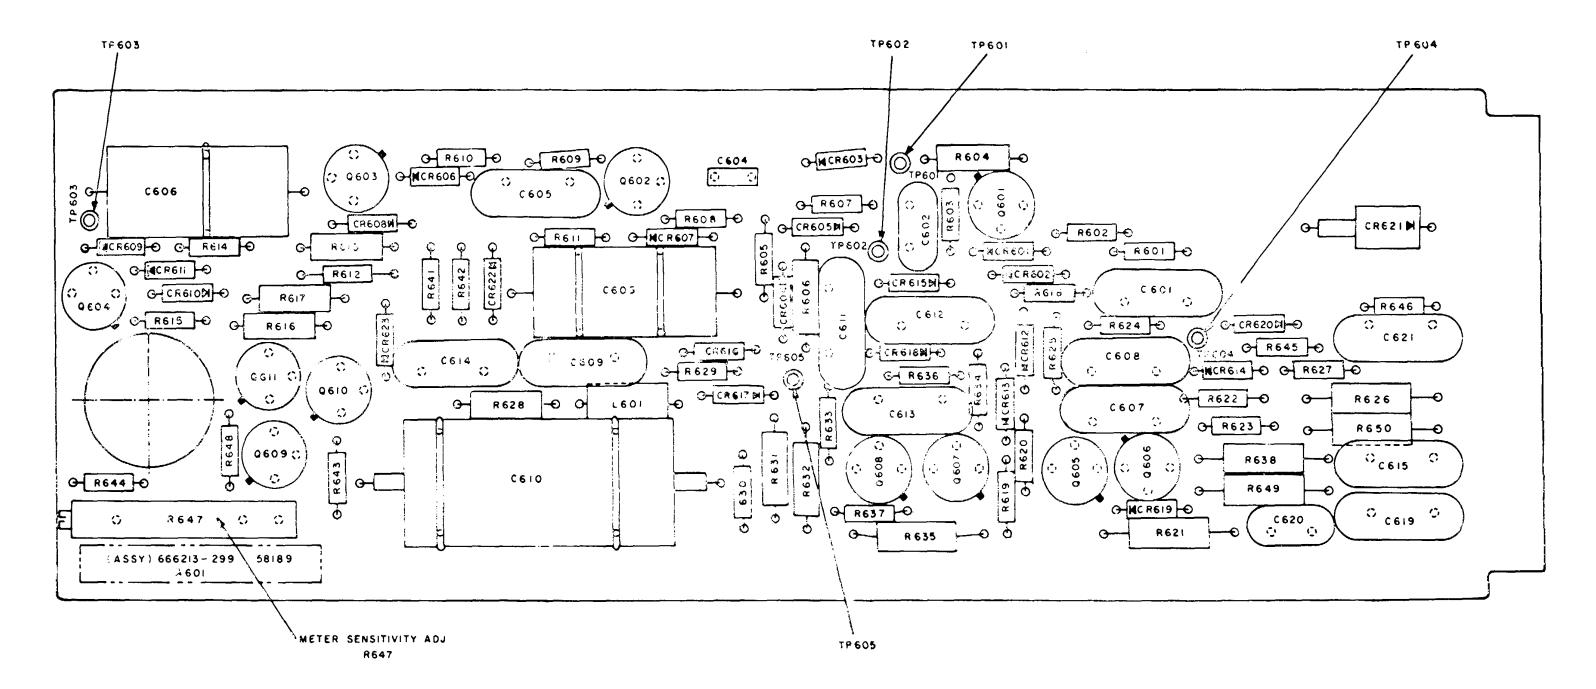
Video Board A601, Location of Test Points and Adjustments
